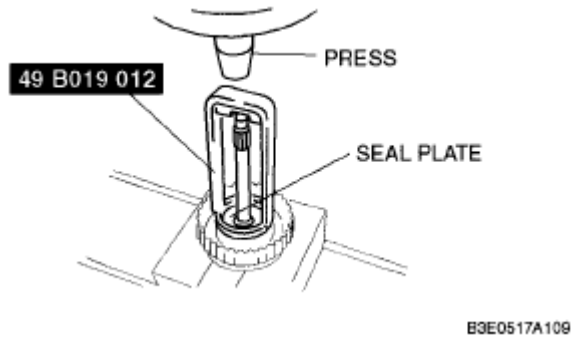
Removing Seal Plate And Spring And Retainer Component
